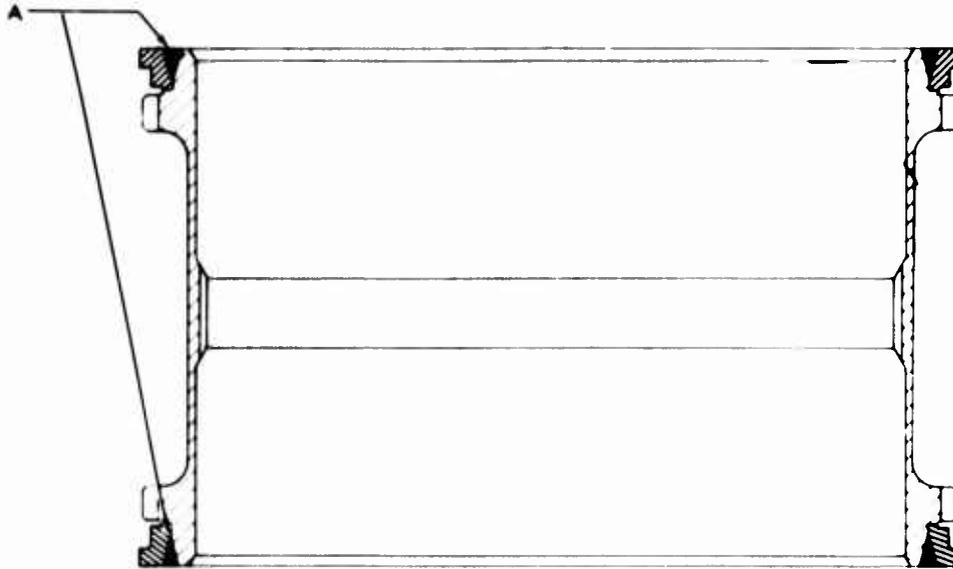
Assembled View of Sun Gear Showing Electron Beam Welds.
